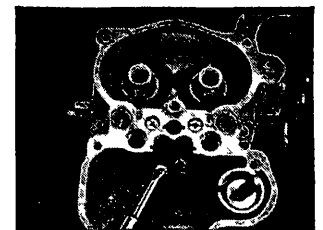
must be installed snugly, but not so tight as to cause distortion
